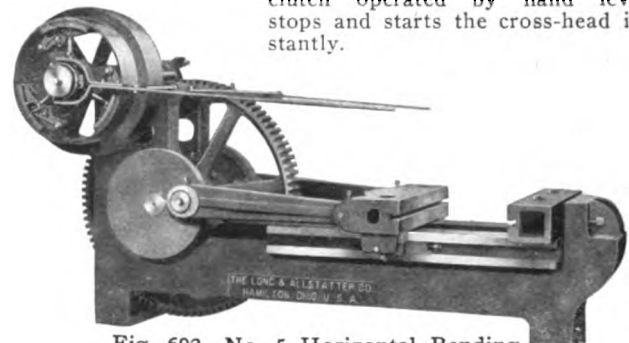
No. 5 Horizontal Bending and Forming Machine
